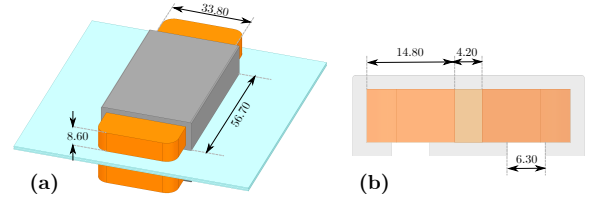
Physical dimensions of the optimized design:: (a): 3D view, (b): Cross-sectional view. (All dimensions are in mm).
